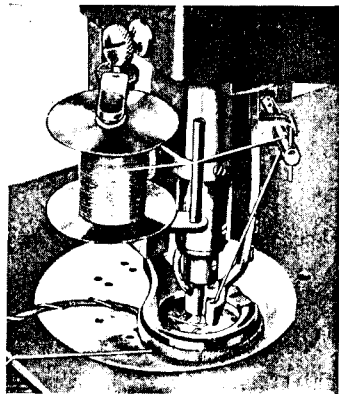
Machine Threaded and Adjusted for Gimp Embroidery
